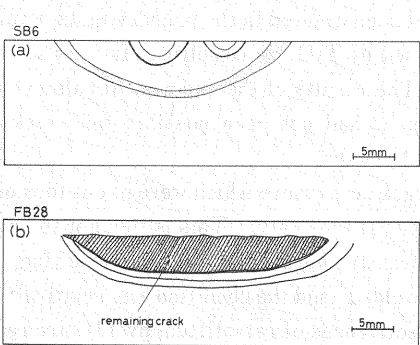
Beach Marks on Failure Surfaces of Retrofitted Specimens.
